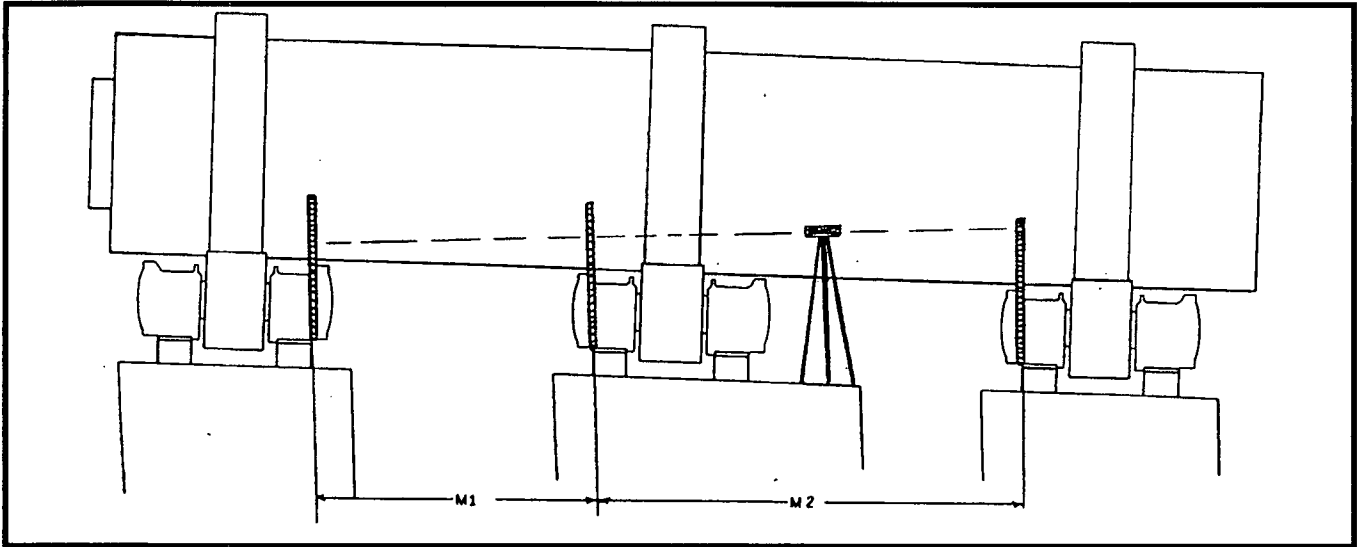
Check mixer frame elevations on the machined surfaces.
